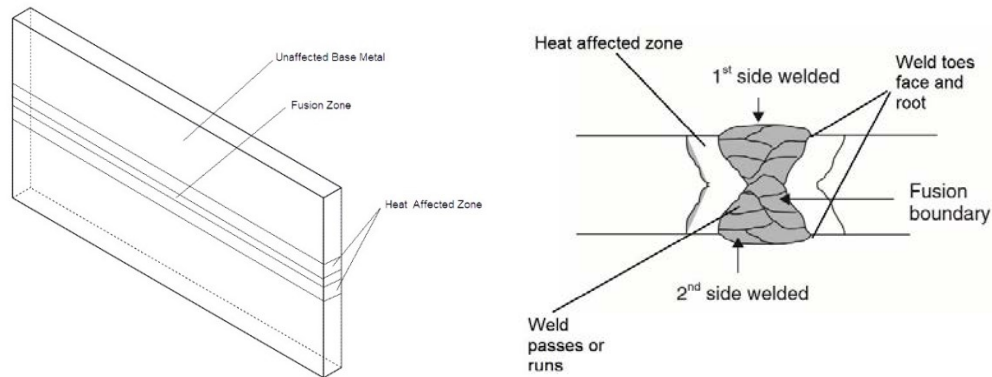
Sketch of the different zones which may form in a welded component.
